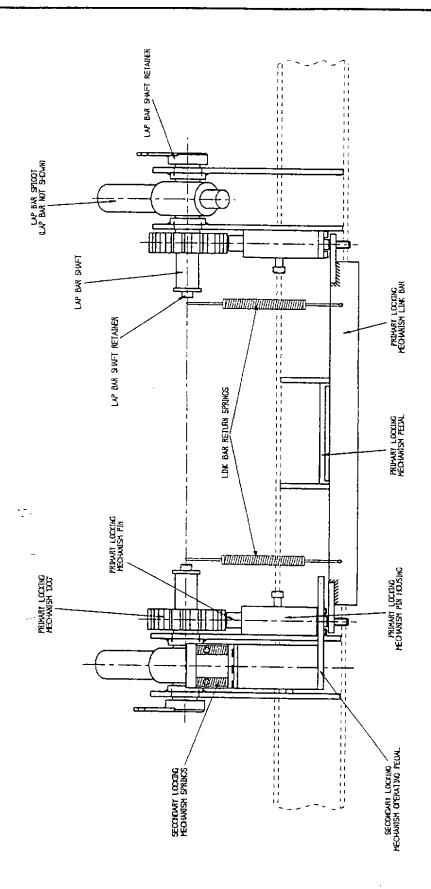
LAP BAR PRIMARY & SECONDARY LOCKING MECHANISMS (AS VIEWED WITH INSPECTION COVER REMOVED)
